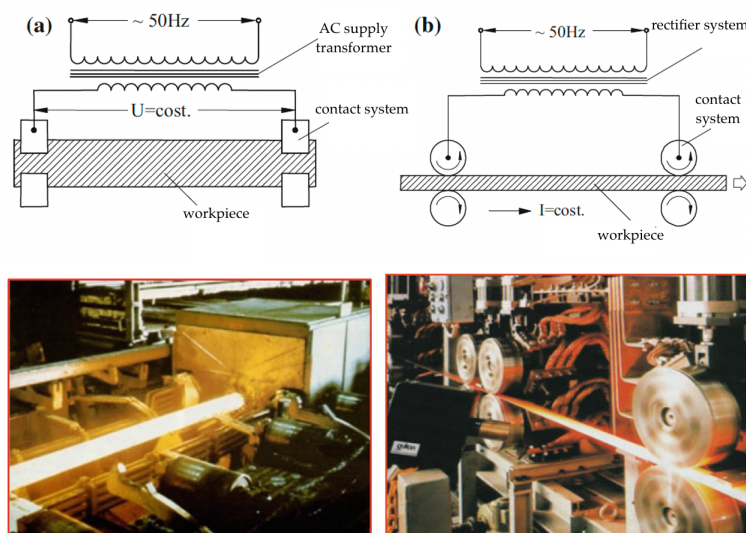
DRH installations Schematic a with the fixed workpiece; b with moving the workpiece
